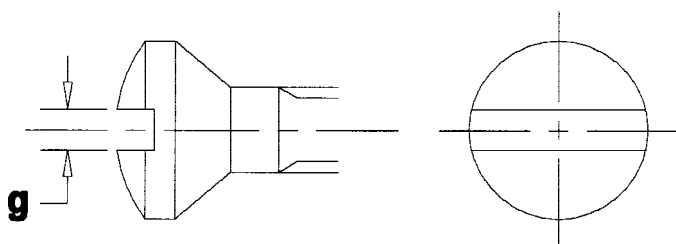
Schematic of Screw with Single-Slot Drive Connection (Table A6.1)
